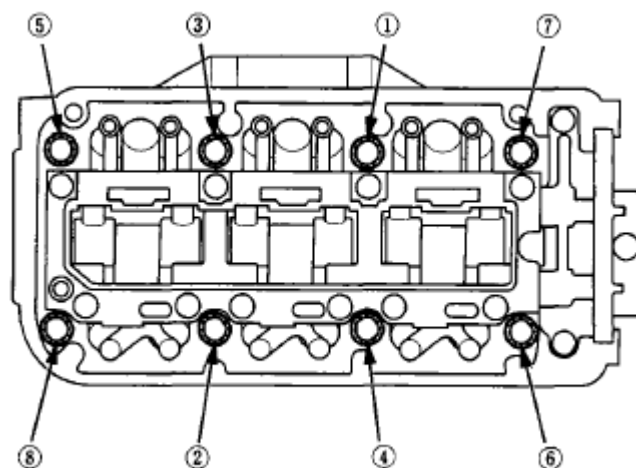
Identifying Cylinder Head Bolts Tightening Sequence - Rear
